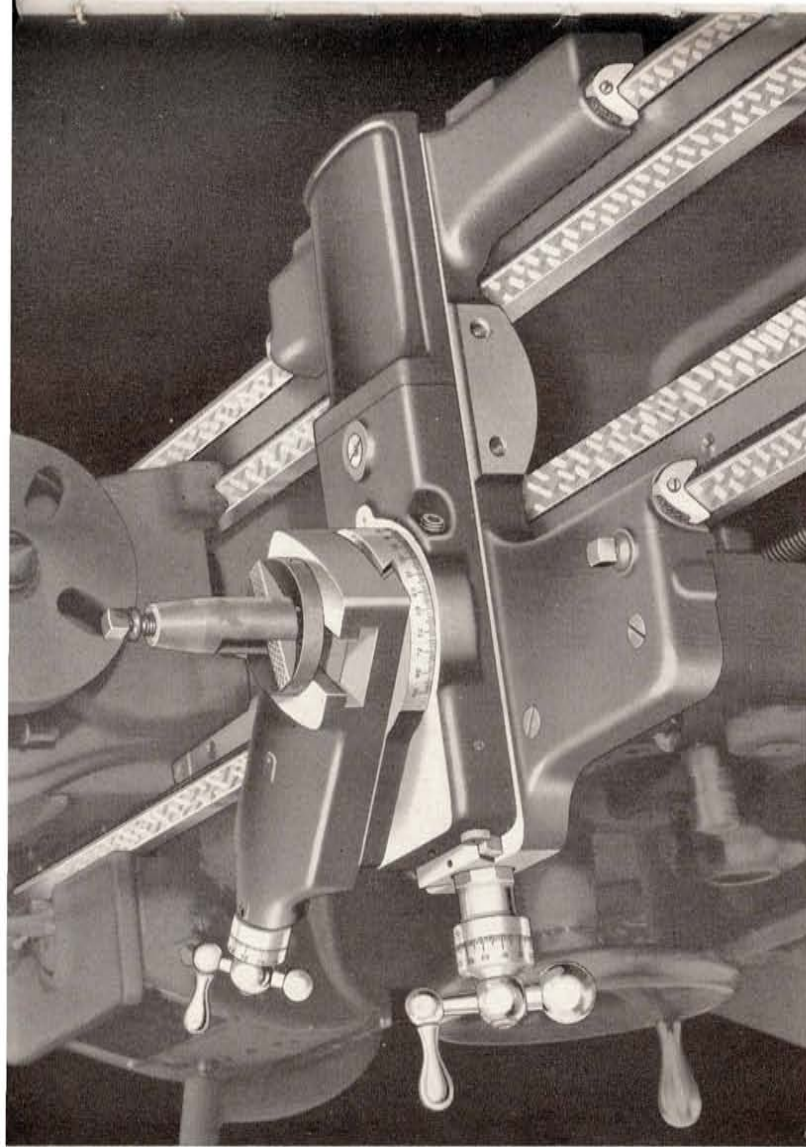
Improved Saddle and Compound Rest for South Bend Lathes
